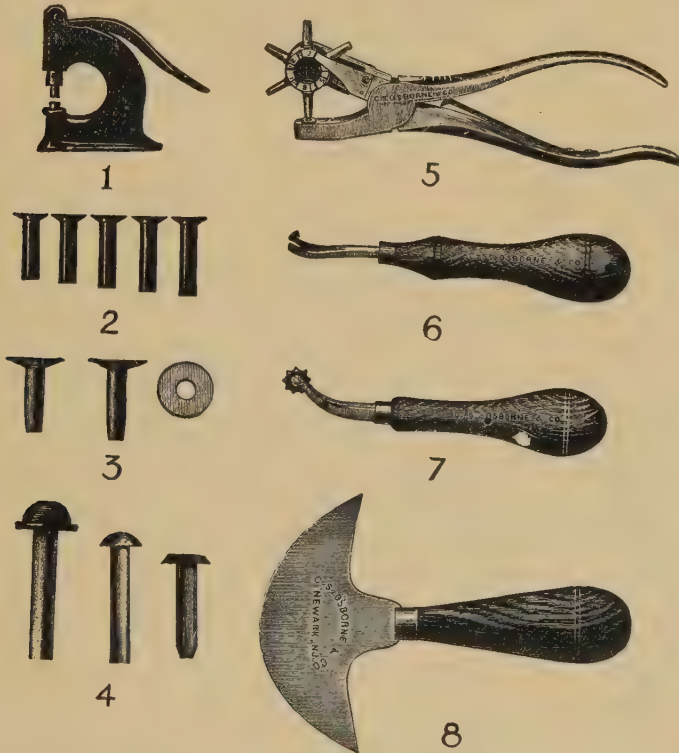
1. HAND RIVETER. 2. TUBULAR RIVETS. 3. COPPER RIVETS. 4. HAME RIVETS. 5. REVOLVING PUNCH. 6. EDGER. 7. FINISHING WHEEL. 8. KNIFE.
